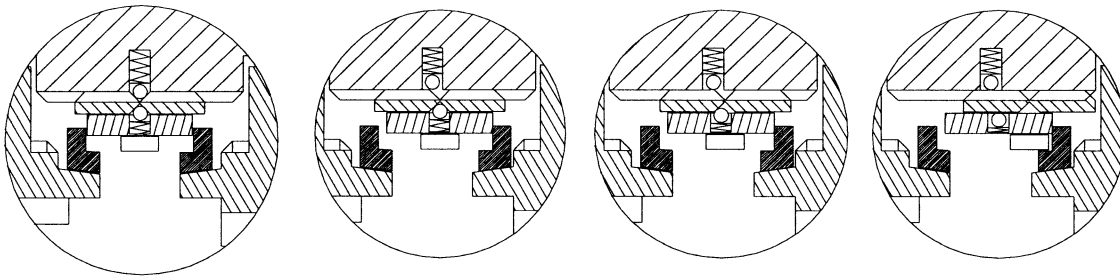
Typical section of inverted synchroniser mechanism
